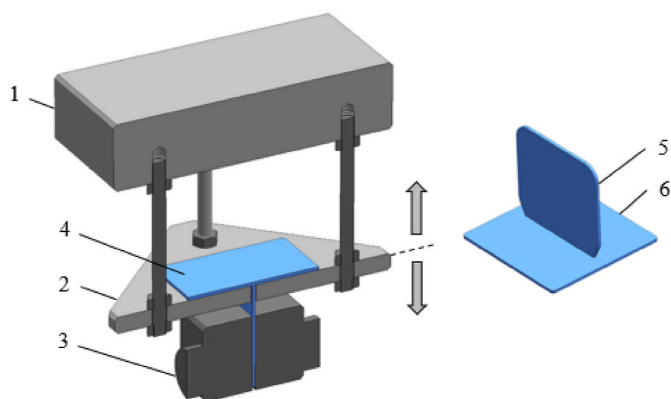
Test setup of the base plate and rib for measuring bonding strength between the base plate and an overmolded rib (1 – tensile machine, 2 – support plate, 3 – vice-jaw, 4 – specimen, 5 – rib, 6 – base plate).
